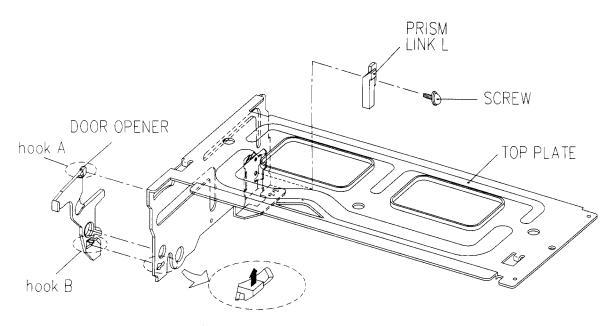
DISASSEMBLY OF THE TOP PLATE
